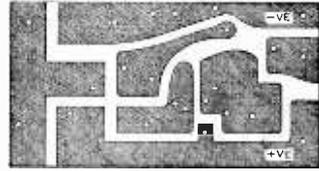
An actual-size representation of the printed circuit board ($1\frac{3}{8}$ in. x $\frac{7}{8}$ in.).
